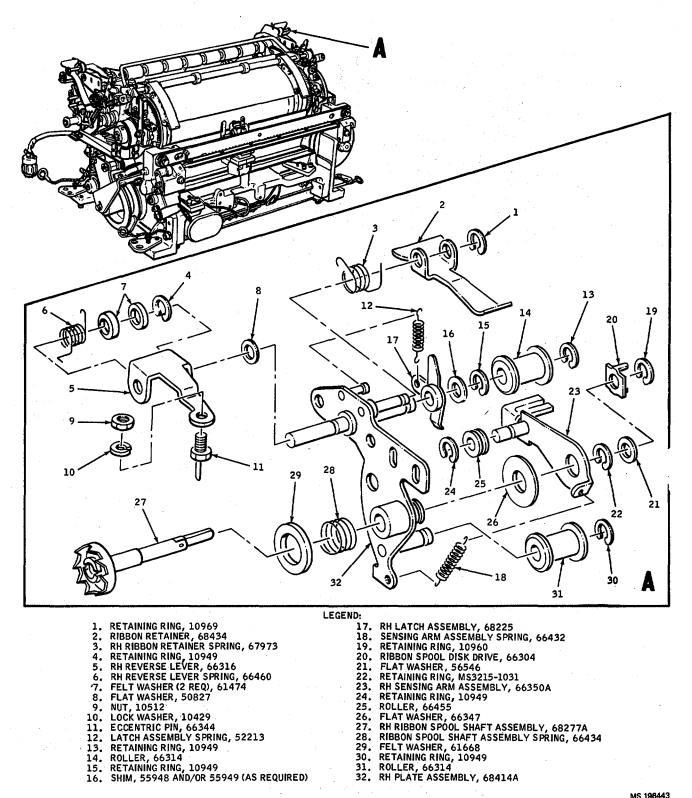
Right Hand Ribbon Feed Assembly, Exploded View
